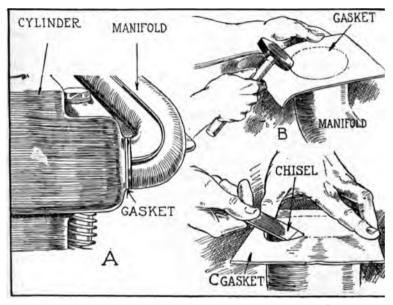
Method of Cutting Inlet Manifold Gasket.
